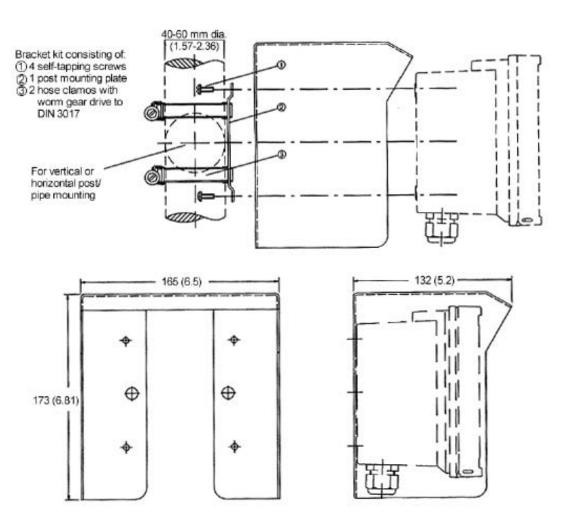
Dimension Drawing for APT4000 with Wall or Pipe Mounting
